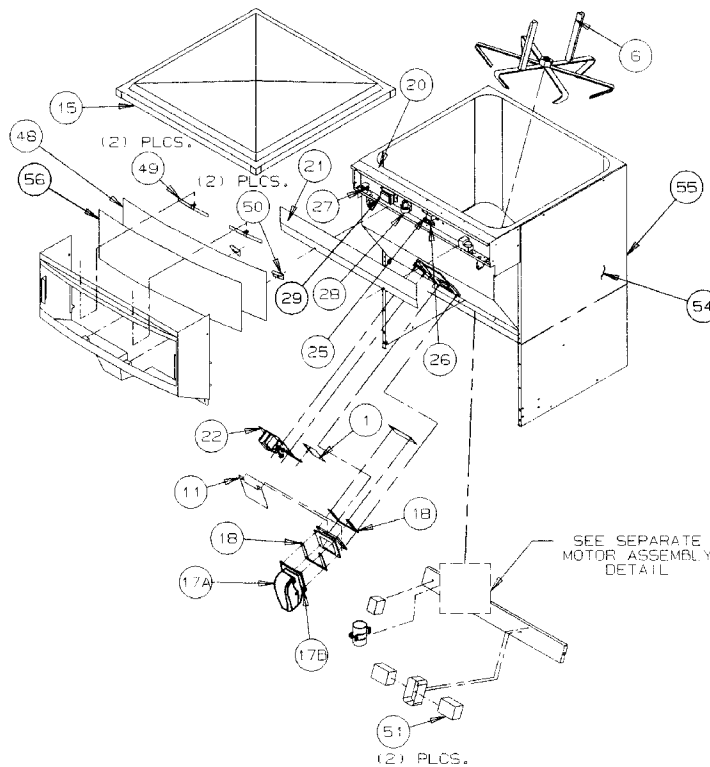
EXPLODED VIEW - UPPER SECTION AND PARTS LIST
